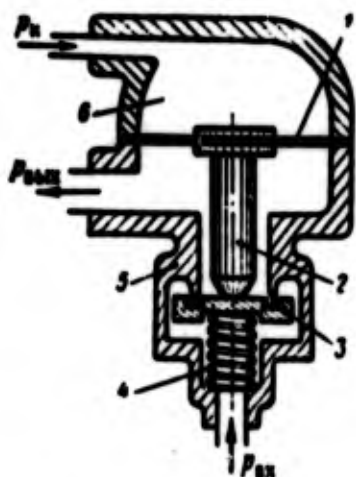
Diagram of a reduction valve with variable adjustment: 1.- diaphragm; 2 - rod; 3 - valve; 4 - locking spring; 5 - valve seat; 6 - reduction valve chamber.
